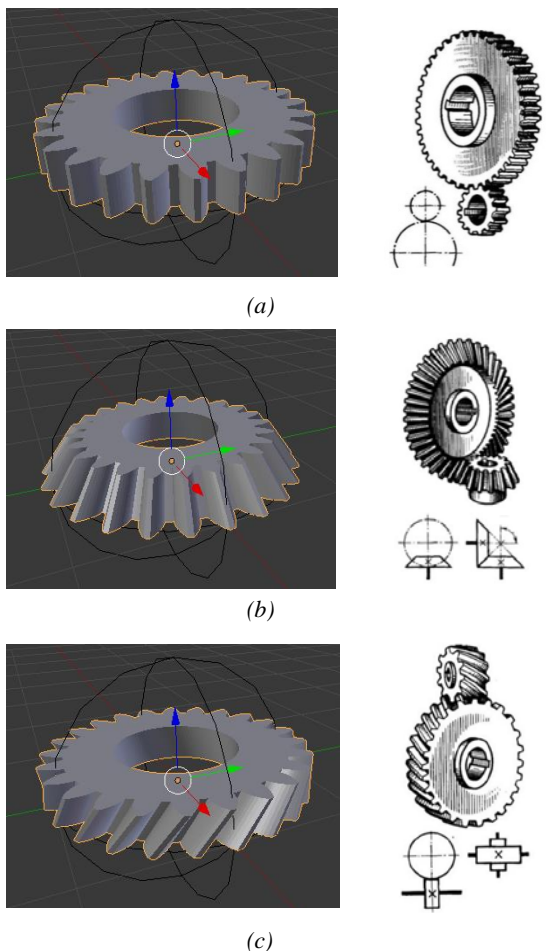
3D Gears: (a) cylindrical (b) bevel (c) helical
